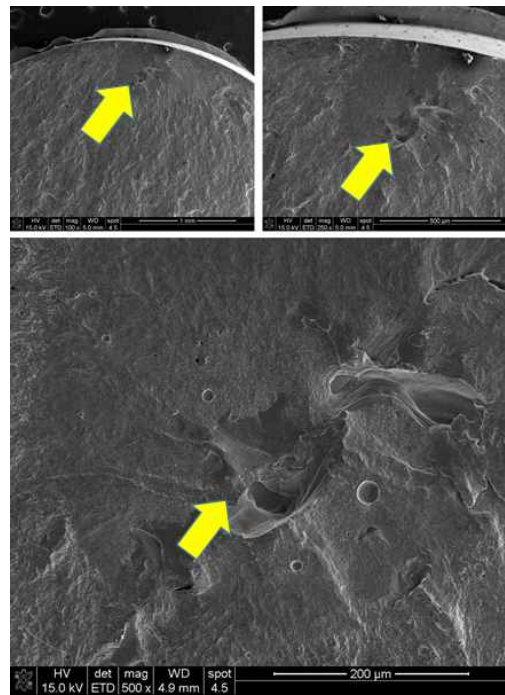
Fatigue fracture of specimen with polished surface (ZM); The arrow indicates the crack start point
